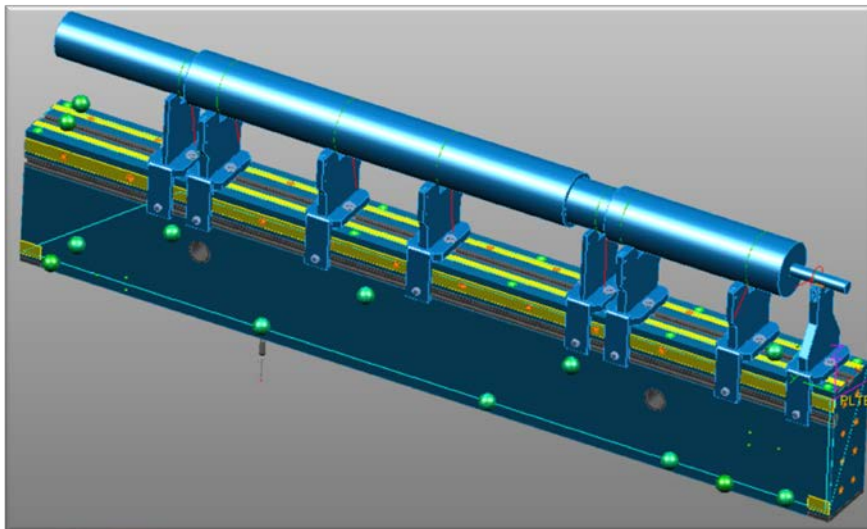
Representation of the CMM model of Case C during the dimensional control
